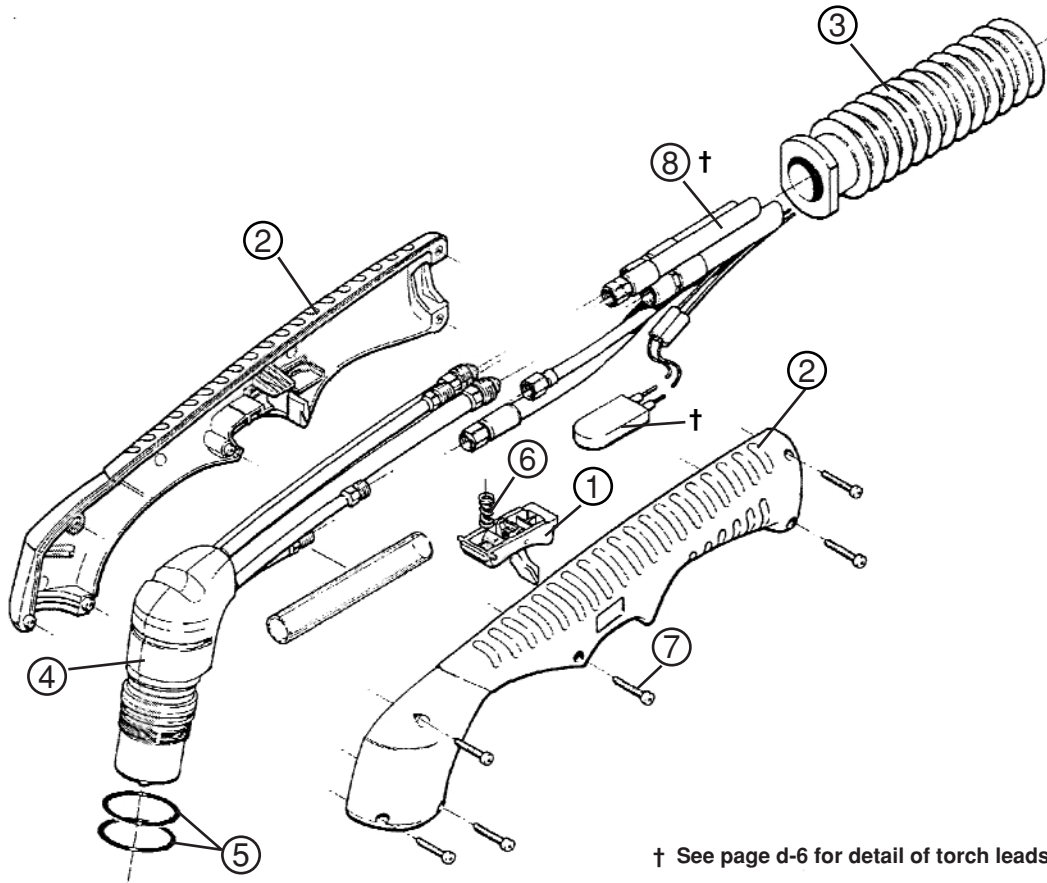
PAC200T (65°) Cutting Torch Assembly
